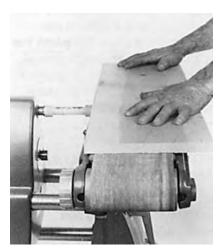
To sand large workpieces, remove the worktable. Use extra care, as you have no additional support other than the belt sander itself.
